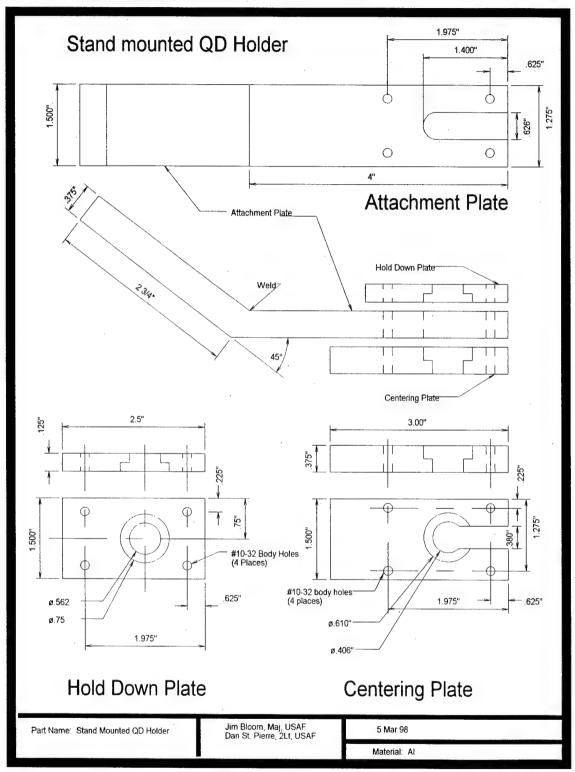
Stand mounted Quick Disconnect holder. This is welded to the stand (Figure 3.4.1.1) and provides a solid mount for the airline running up the pipe.
